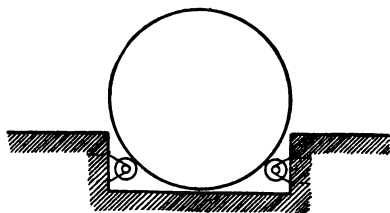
Diagram of pit equipped with rolls for welding circumferential seams.
